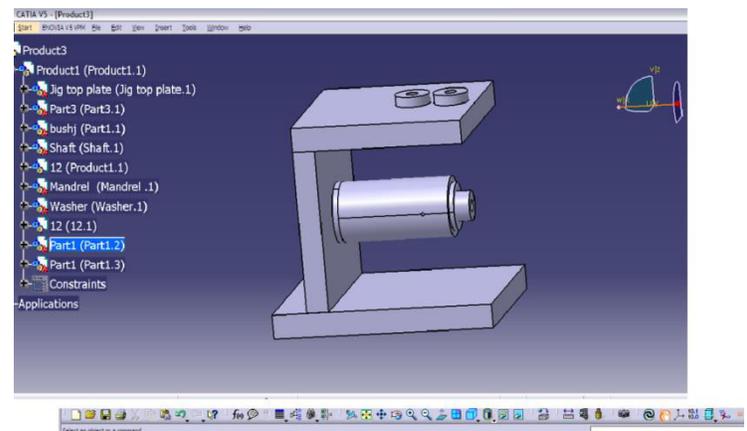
CATIA V5R20 Model of Assembled Drill Jig
